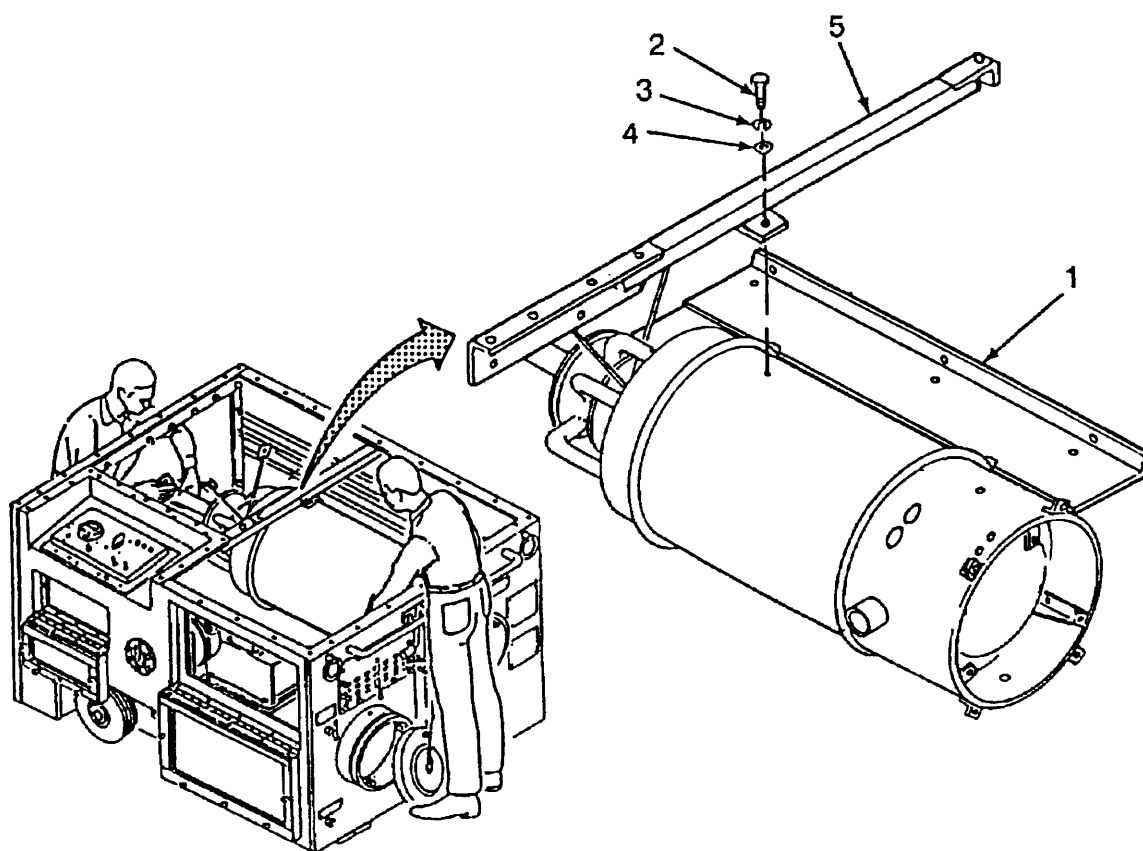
Heat Exchanger, (Model H120-1) Removal
